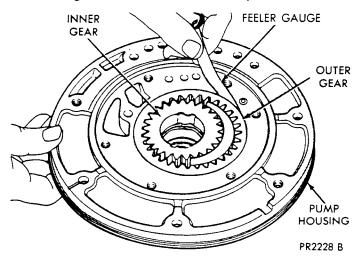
Measuring Pump Clearance (Gear to Pocket)
